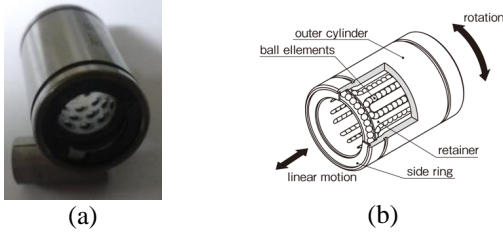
(a) The used slide-rotary bush, and (b) the internal structure of the slide-rotary bush [20].
